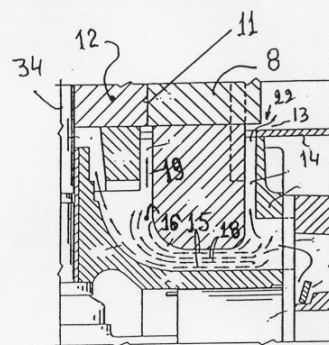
Hot and cold flow pattern of the discharge gas in the motor cavity
